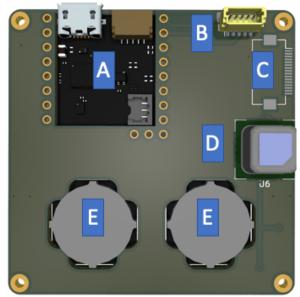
BACK OF THE PCB DESIGN FROM KICAD A: NICLA B: CONNECTION TO SPS 30 PARTICLE COUNTER C: FLEXIBLE PRINTED CIRCUIT (FPC) CONNECTOR TO GPS MODULE D: CO2 SENSOR E: SPEC GAS SENSORS
